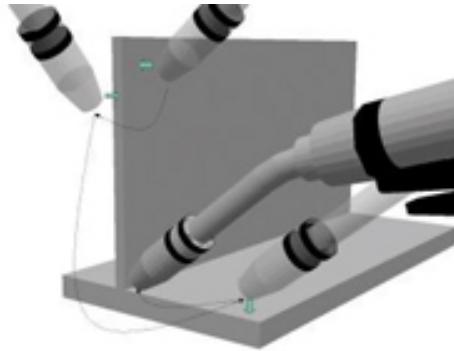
Finding weld seam start point by gas nozzle
